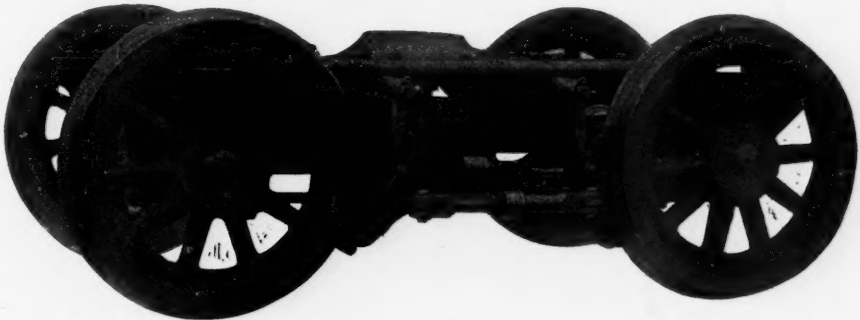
Brake Rigging for a Four-Wheel Locomotive Truck—American Brake Co
